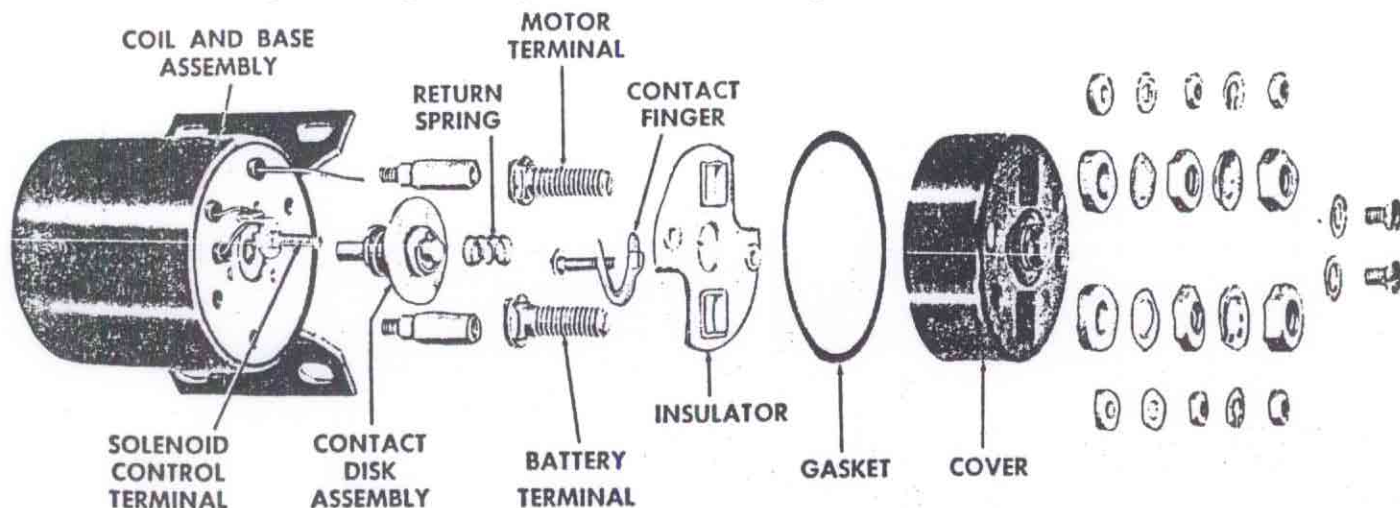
Exploded view of solenoid switch shown in Fig. 4
